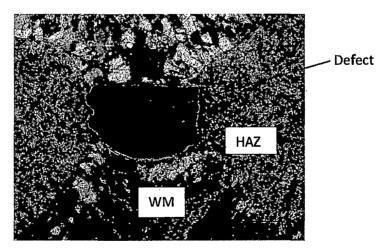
(a): Improper penetration in the weld joint.
